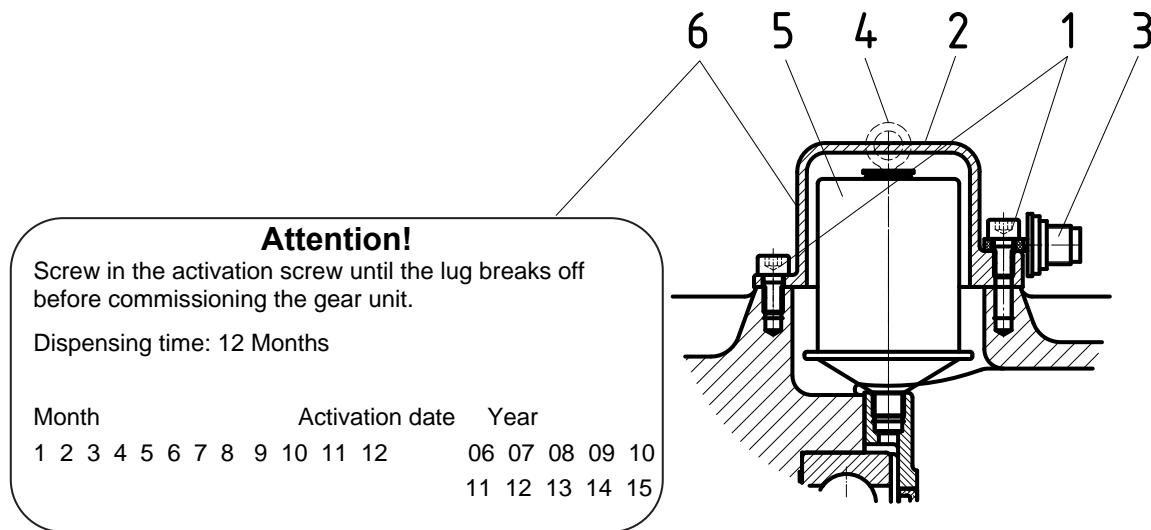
Activating the automatic lubricant dispenser with standard motor mounting
